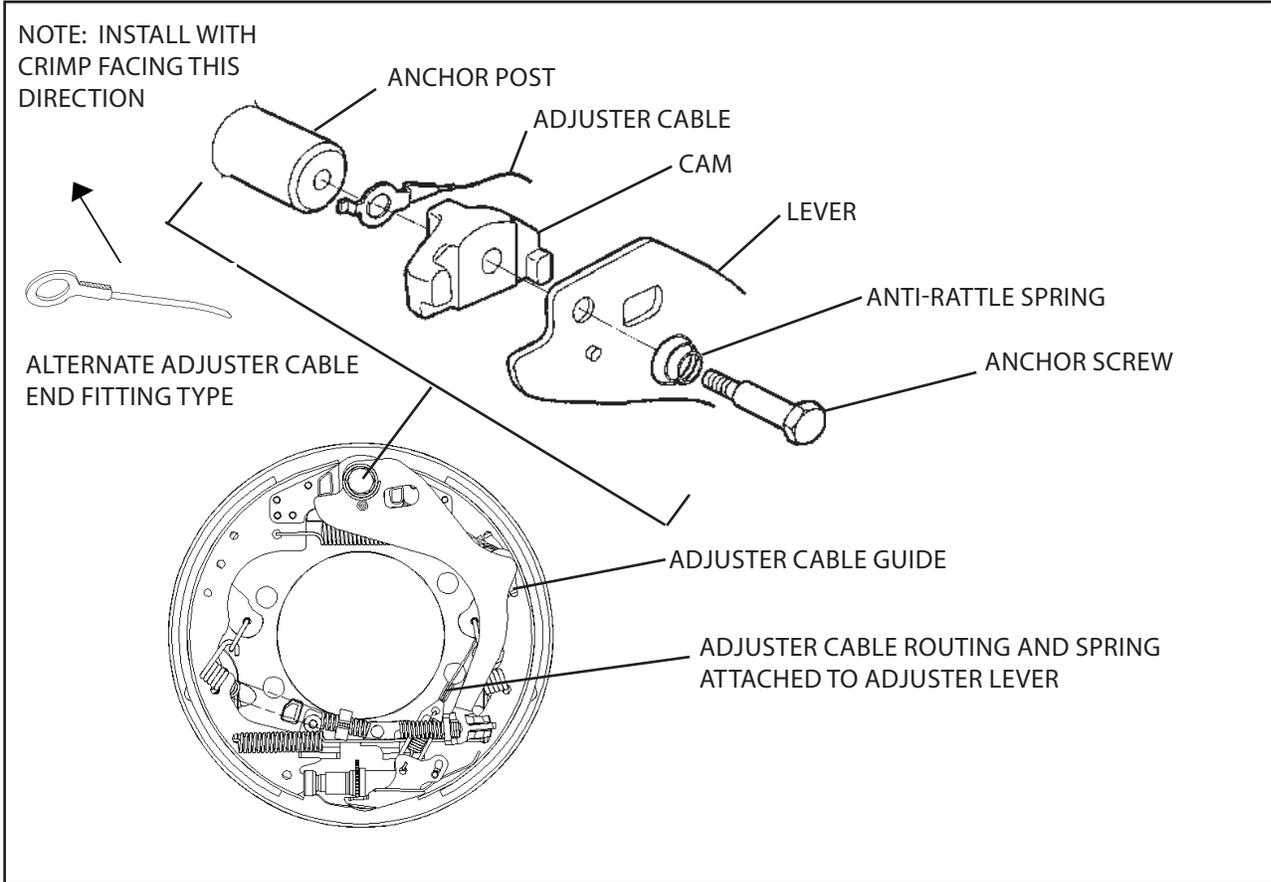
Install Adjuster Cable, Cam Lever, Anti-rattle Spring and Anchor Screw
